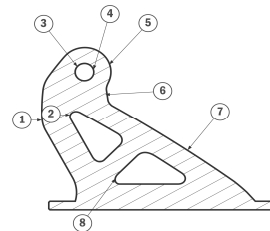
2D dimension measurement point of door hinge with 2mm offset from right side surface
